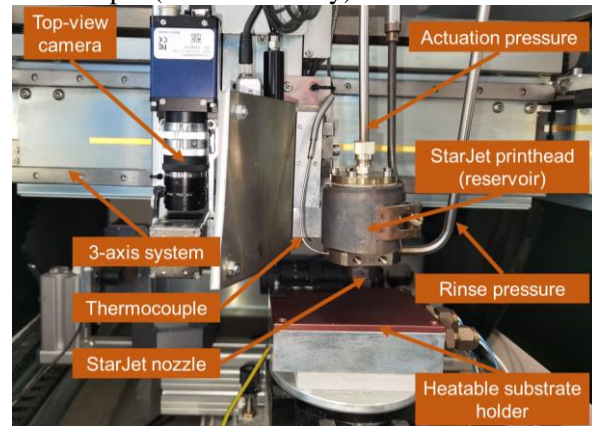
StarJet printhead and its main parts integrated into a 3-axis robotic system with a heatable substrate holder
